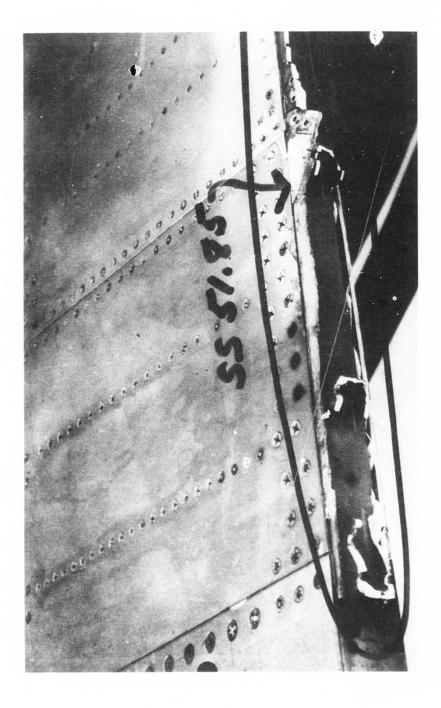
Fatigue Failure of Stabilator Rib
